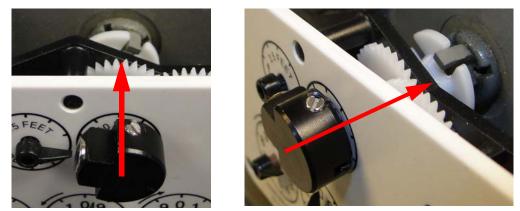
17. Wheel Center Of Rotation Must Align With Meter Drive Center Of Rotation
